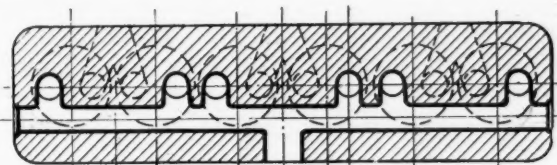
(above)—Section of cylinder head showing short cast-in intake manifold
